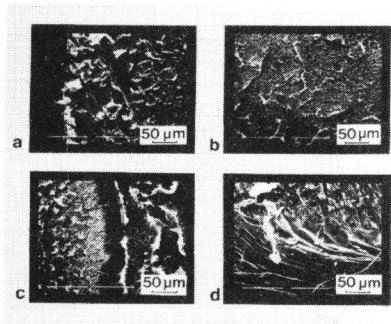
(a) initiation zone (b) fast crack (c) hinge-failure (d) tear-lip.
